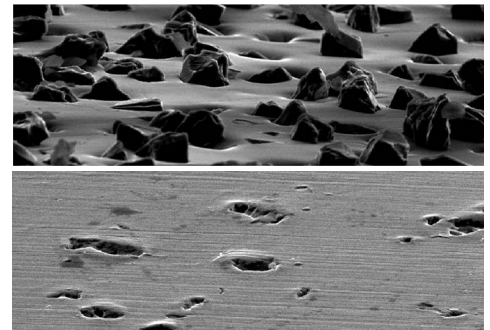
Contact surface of friction joint with 3M™ Friction Shim after assembly and disassembly
